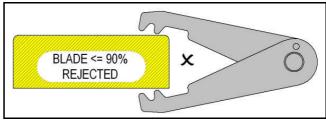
Rejected when the "lower jaws" pass over the blade flanks
